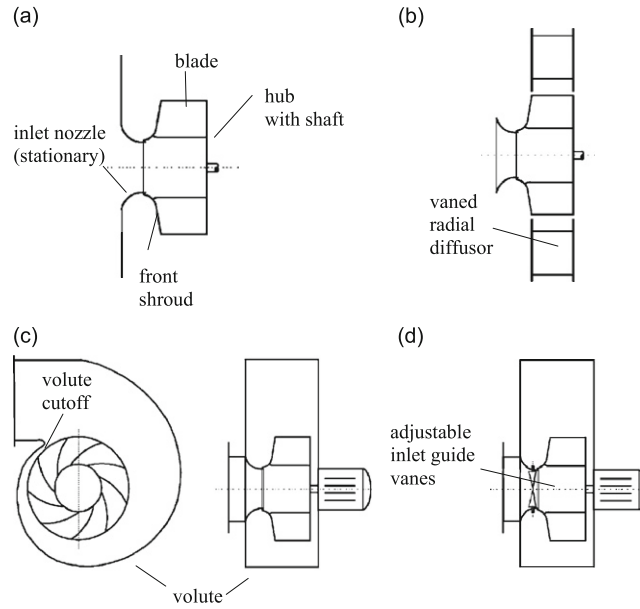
Schematic view of various centrifugal fan assemblies: (a) isolated impeller with stationary inlet nozzle impeller, (b) impeller and vaned radial diffuser at outlet, (c) impeller with simple welded volute and (d) with adjustable inlet guide vanes.
